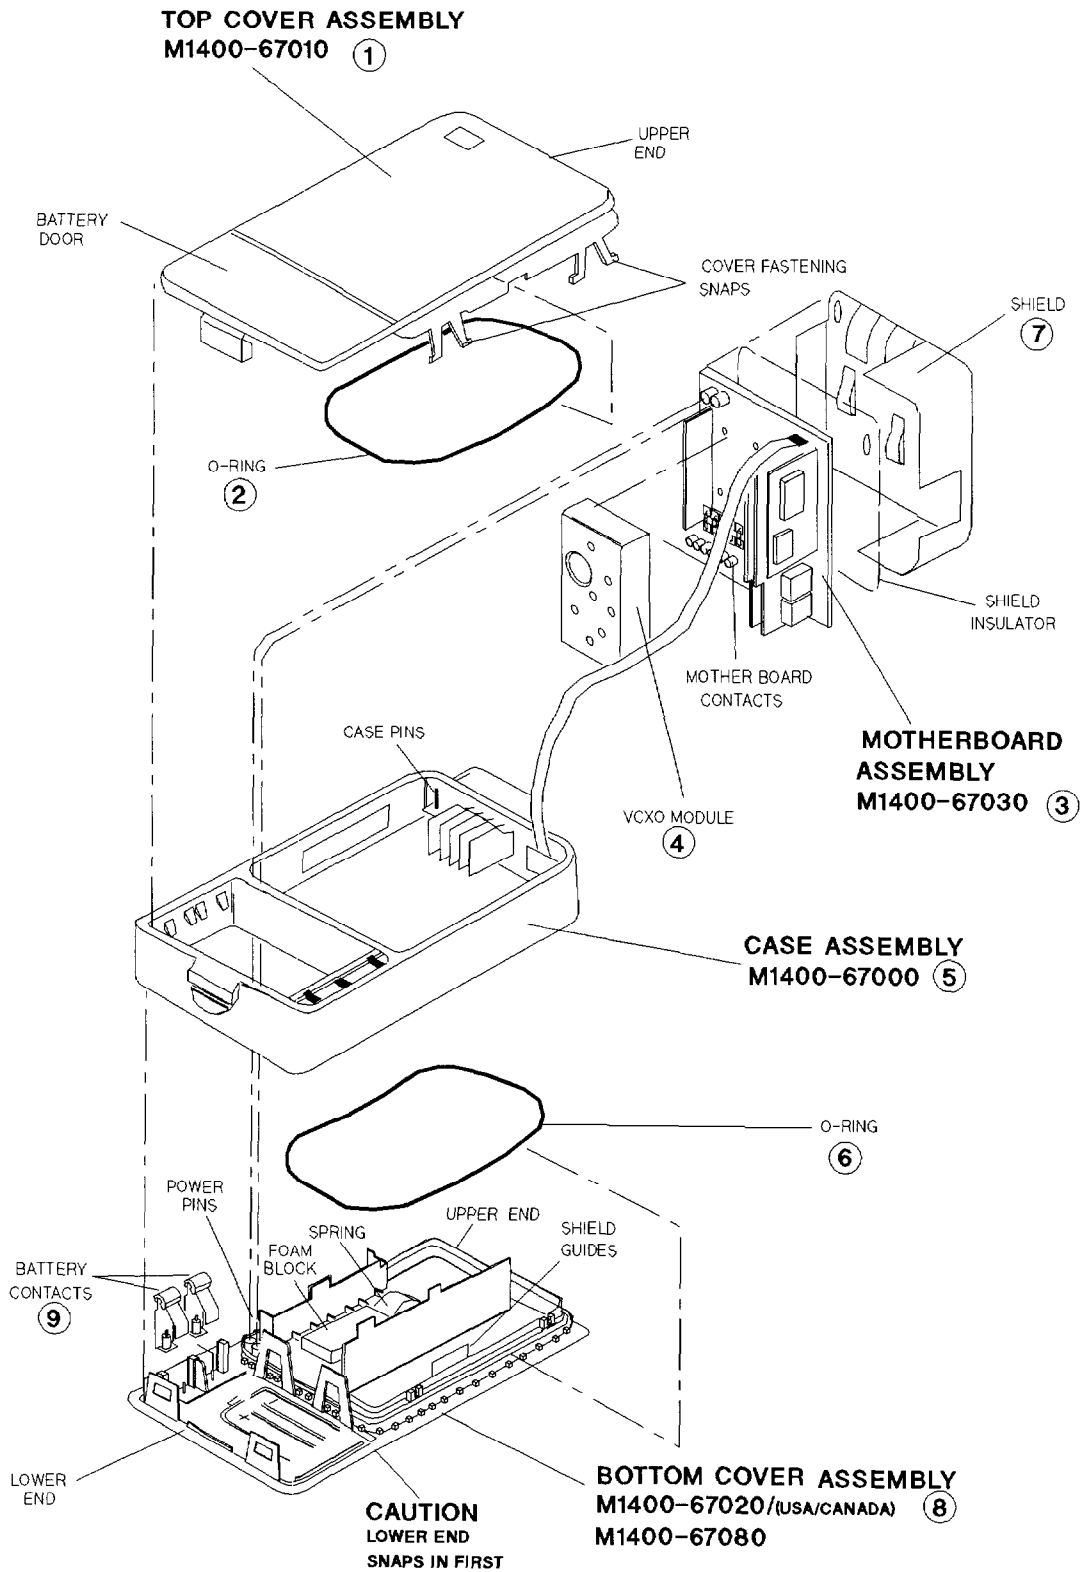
HP M1400A/HP M1400B Transmitter, Exploded View
